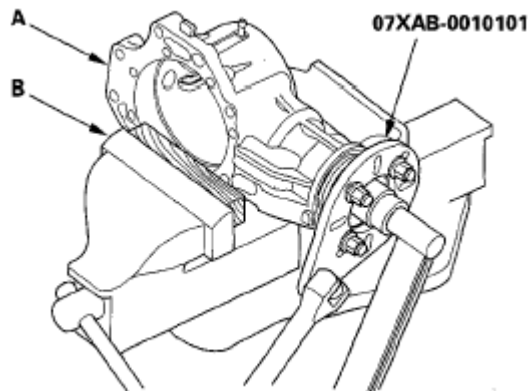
Identifying Transfer Housing In Bench Vise With Companion Flange Holder
